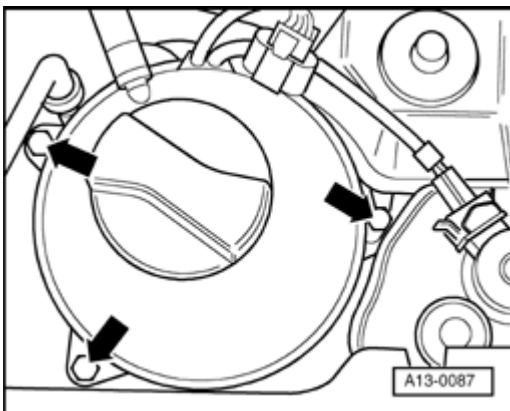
Detaching Coolant Expansion Tank And Power Steering Reservoir
